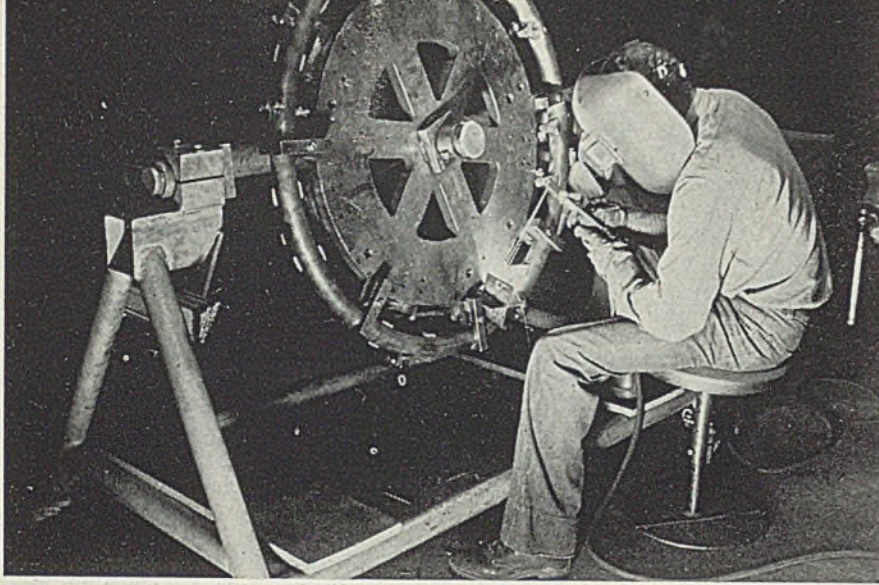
Arc welding engine mount forgings at Douglas. Note how welding fixture is pivoted on two axes so welder can move work to most convenient position. Photo from *Aircraft Tubing Data*. Summerill Tubing Co., Bridgeport, Pa.
